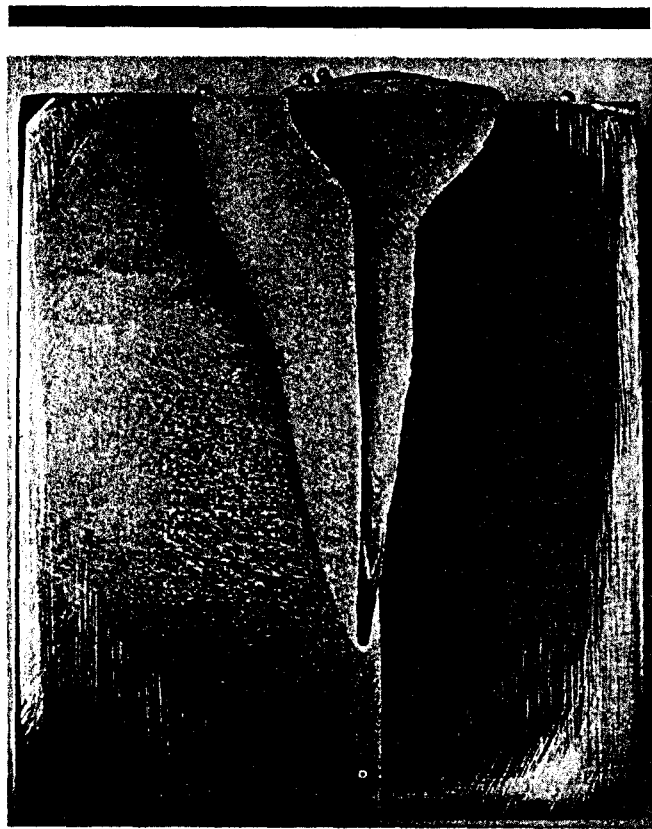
Beam Deflection When Welding Dissimilar Metals
